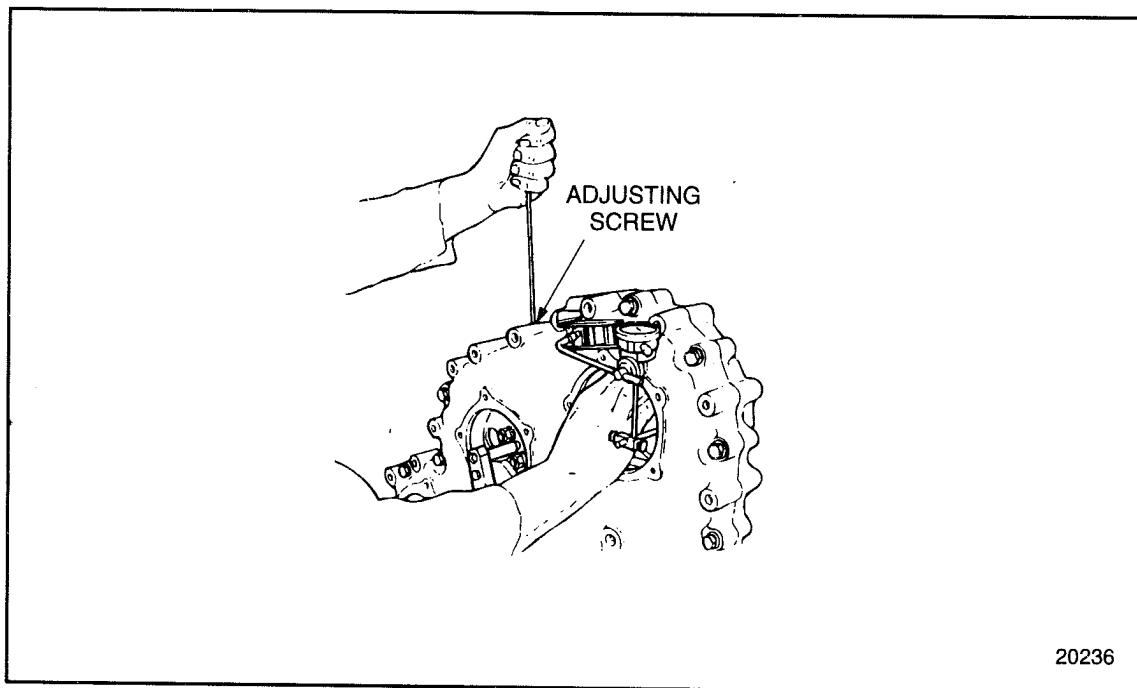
Checking Adjustable Idler Gear-to-Camshaft Drive Gear Lash
